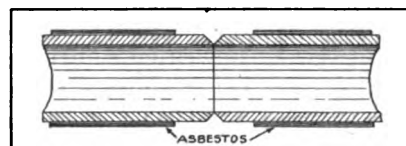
SECTIONAL VIEW OF ENDS READY TO WELD TOGETHER WITH ASBESTOS STRIPS IN PLACE
